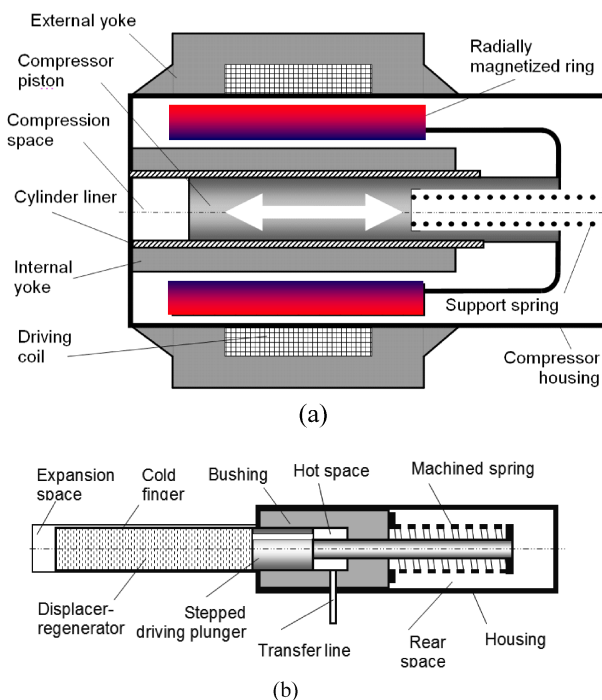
Schematic of a single-piston "moving magnet" linear compressor (a) and pneumatically driven expander (b).
